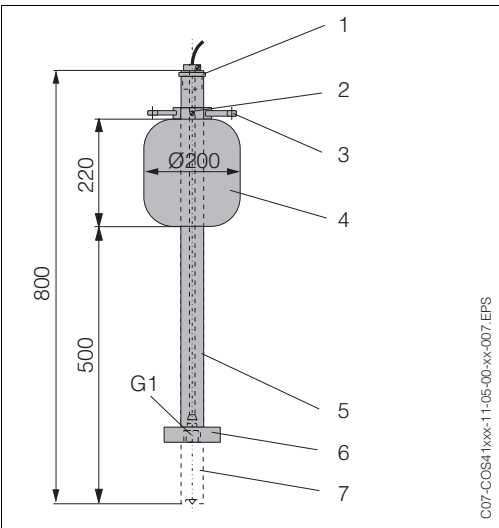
Vertical basin edge mounting CYY 106-A with immersion tube CYY 105-A
